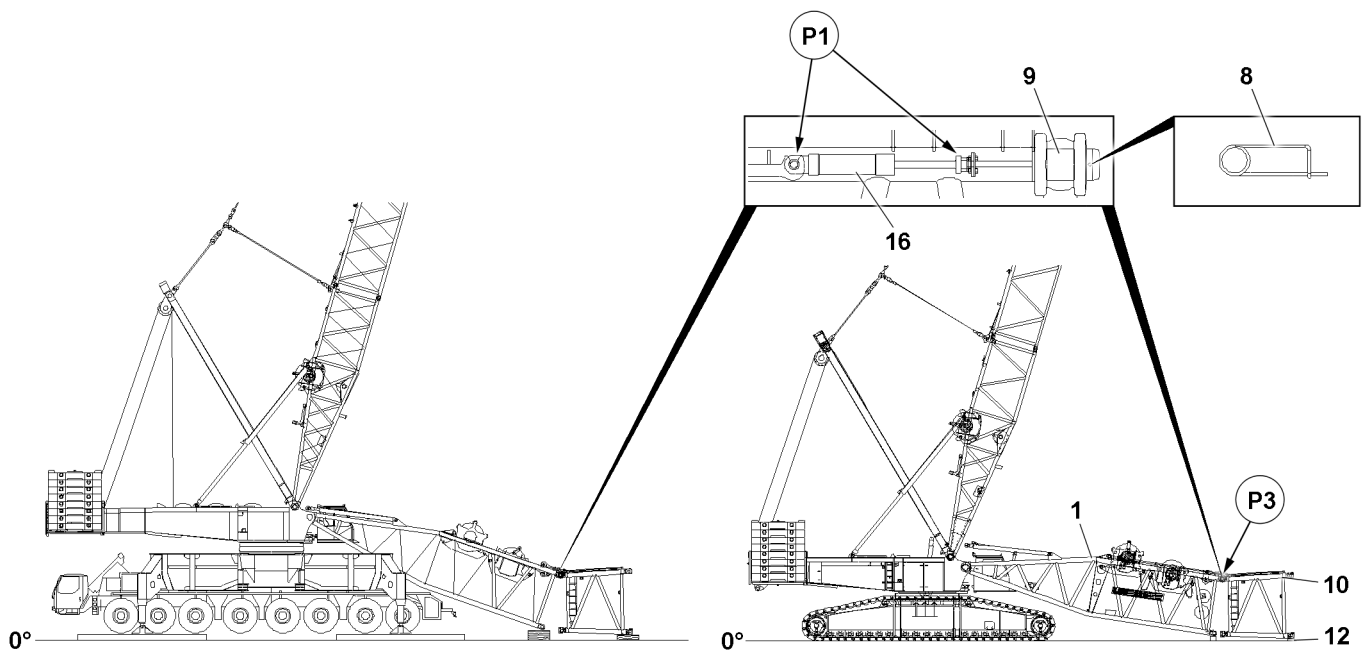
Assembling the SX-reducer RU „bottom“ on the S-pivot section
